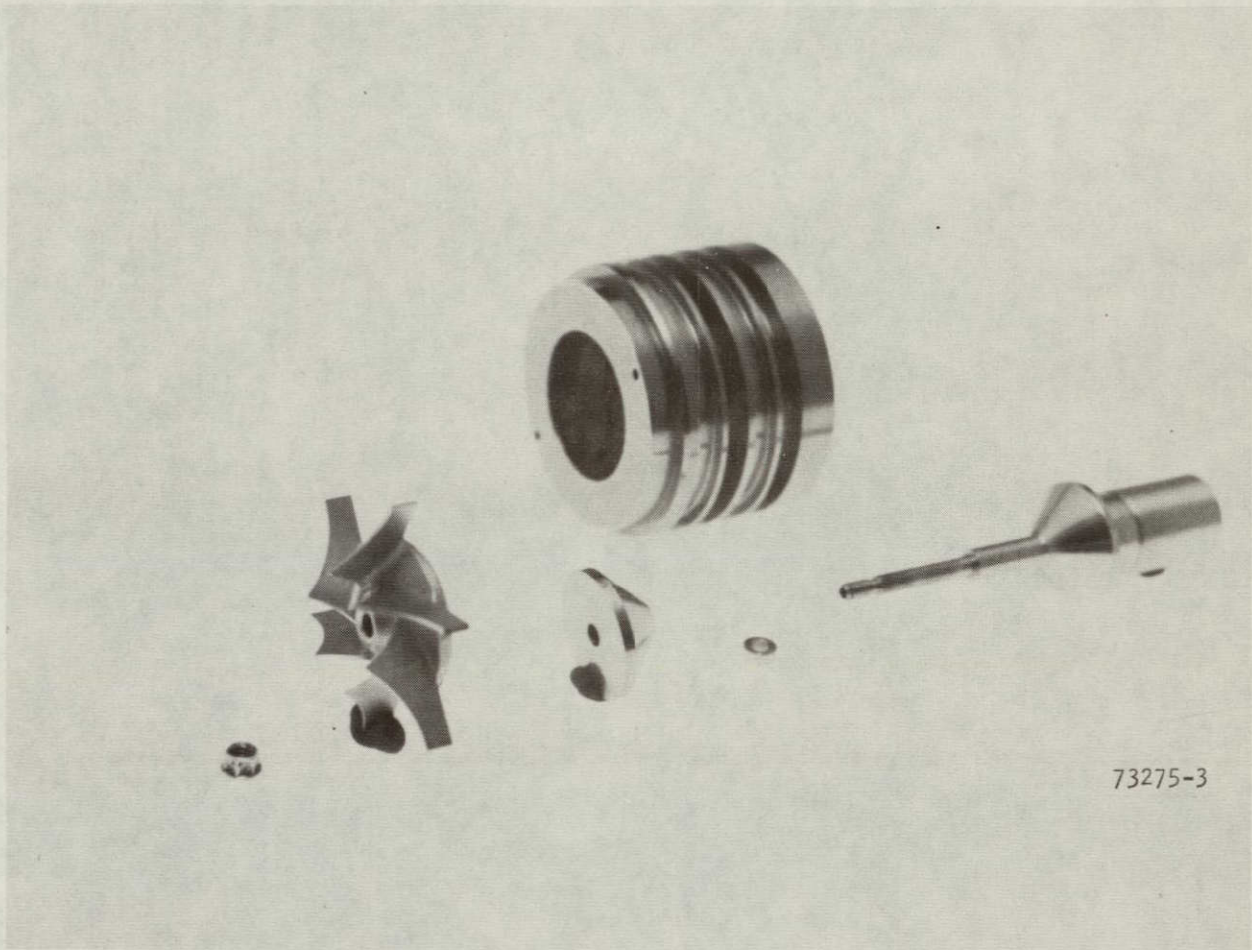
Exploded View of Double Conical Bearing for Pump
